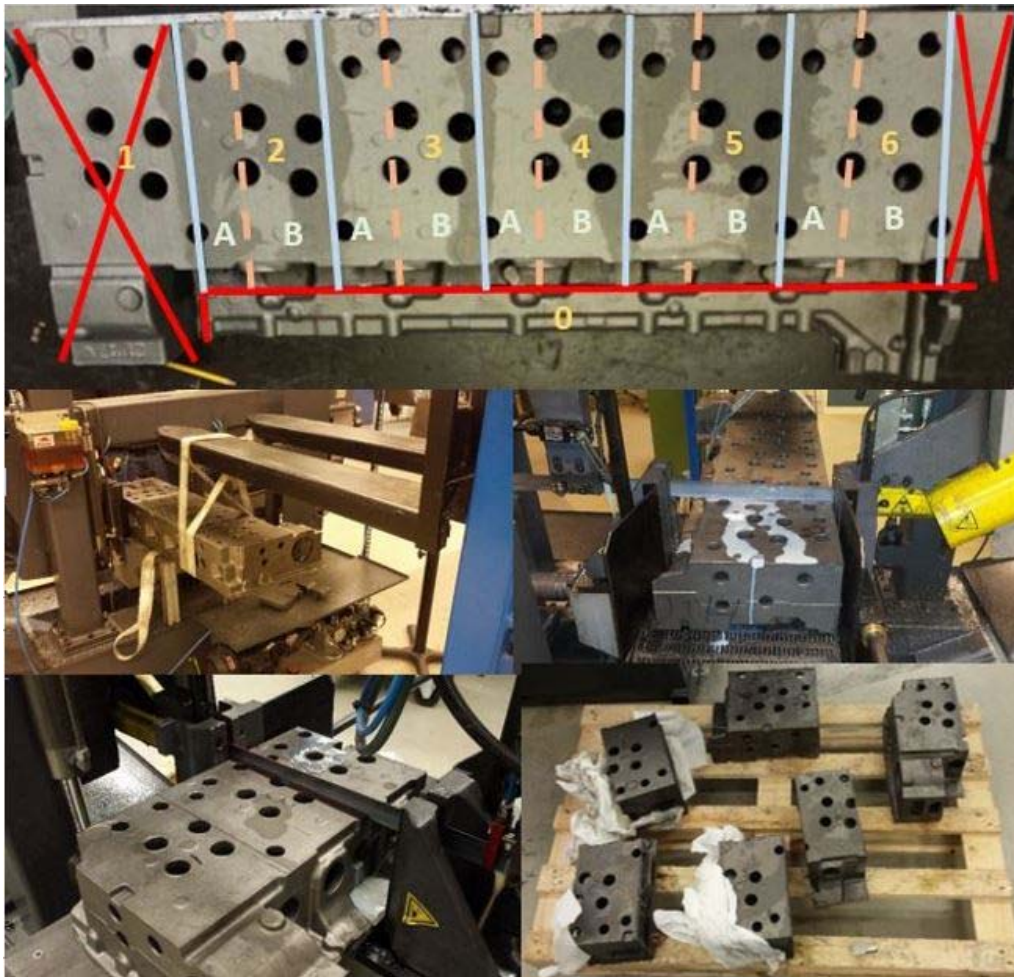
Sectioning of the cylinder head using the bandsaw Bomar Proline 320.280 H.
